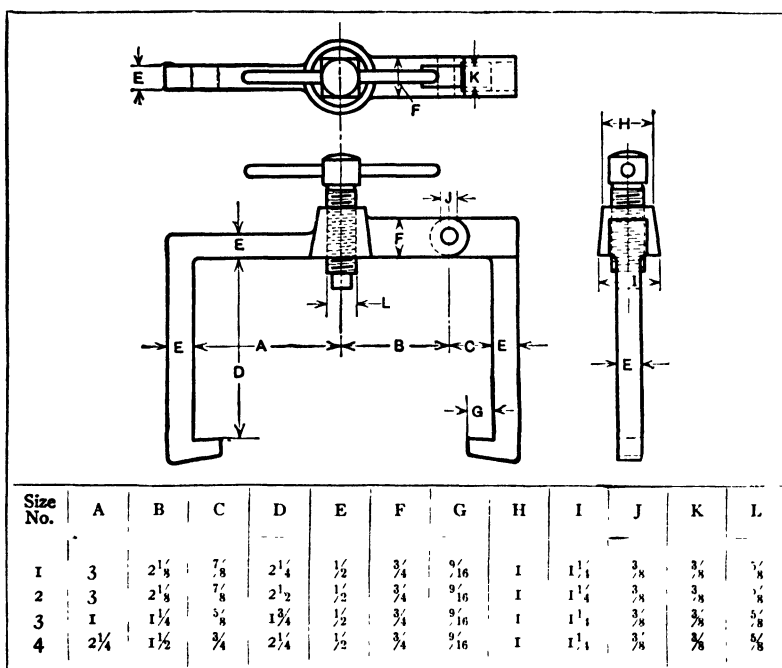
Tabulated Drawing for Toolmaker's Clamps of Different Sizes
